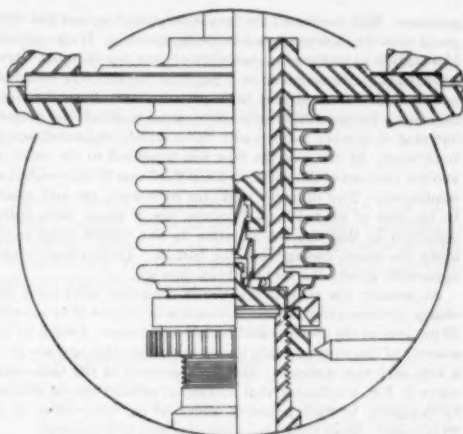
UNBALANCED BELLOWS RELIEF VALVE
